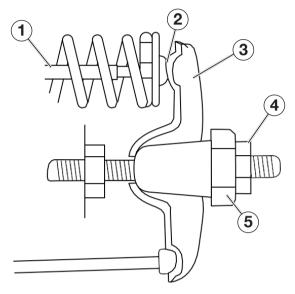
(1) Push Rod, (2) Feeler Gauge Area (3) Rocker Arm, (4) Jam Nut, (5) Adjusting Nut
